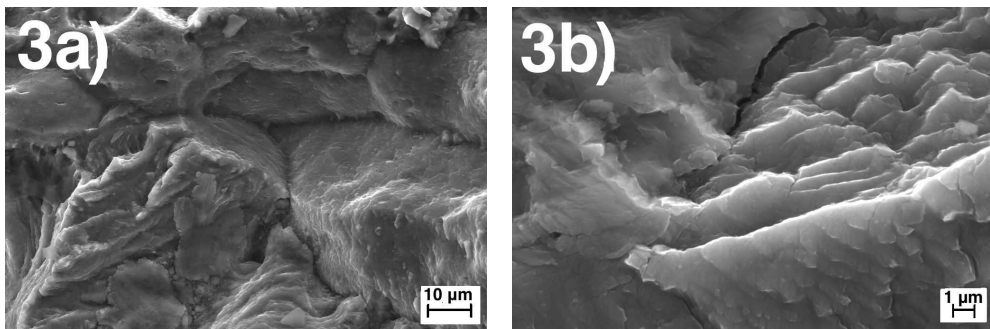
Intergranular cracks (3a) and slip bands (3b) on the fractured surface of AA6082.50-T6 base material.
